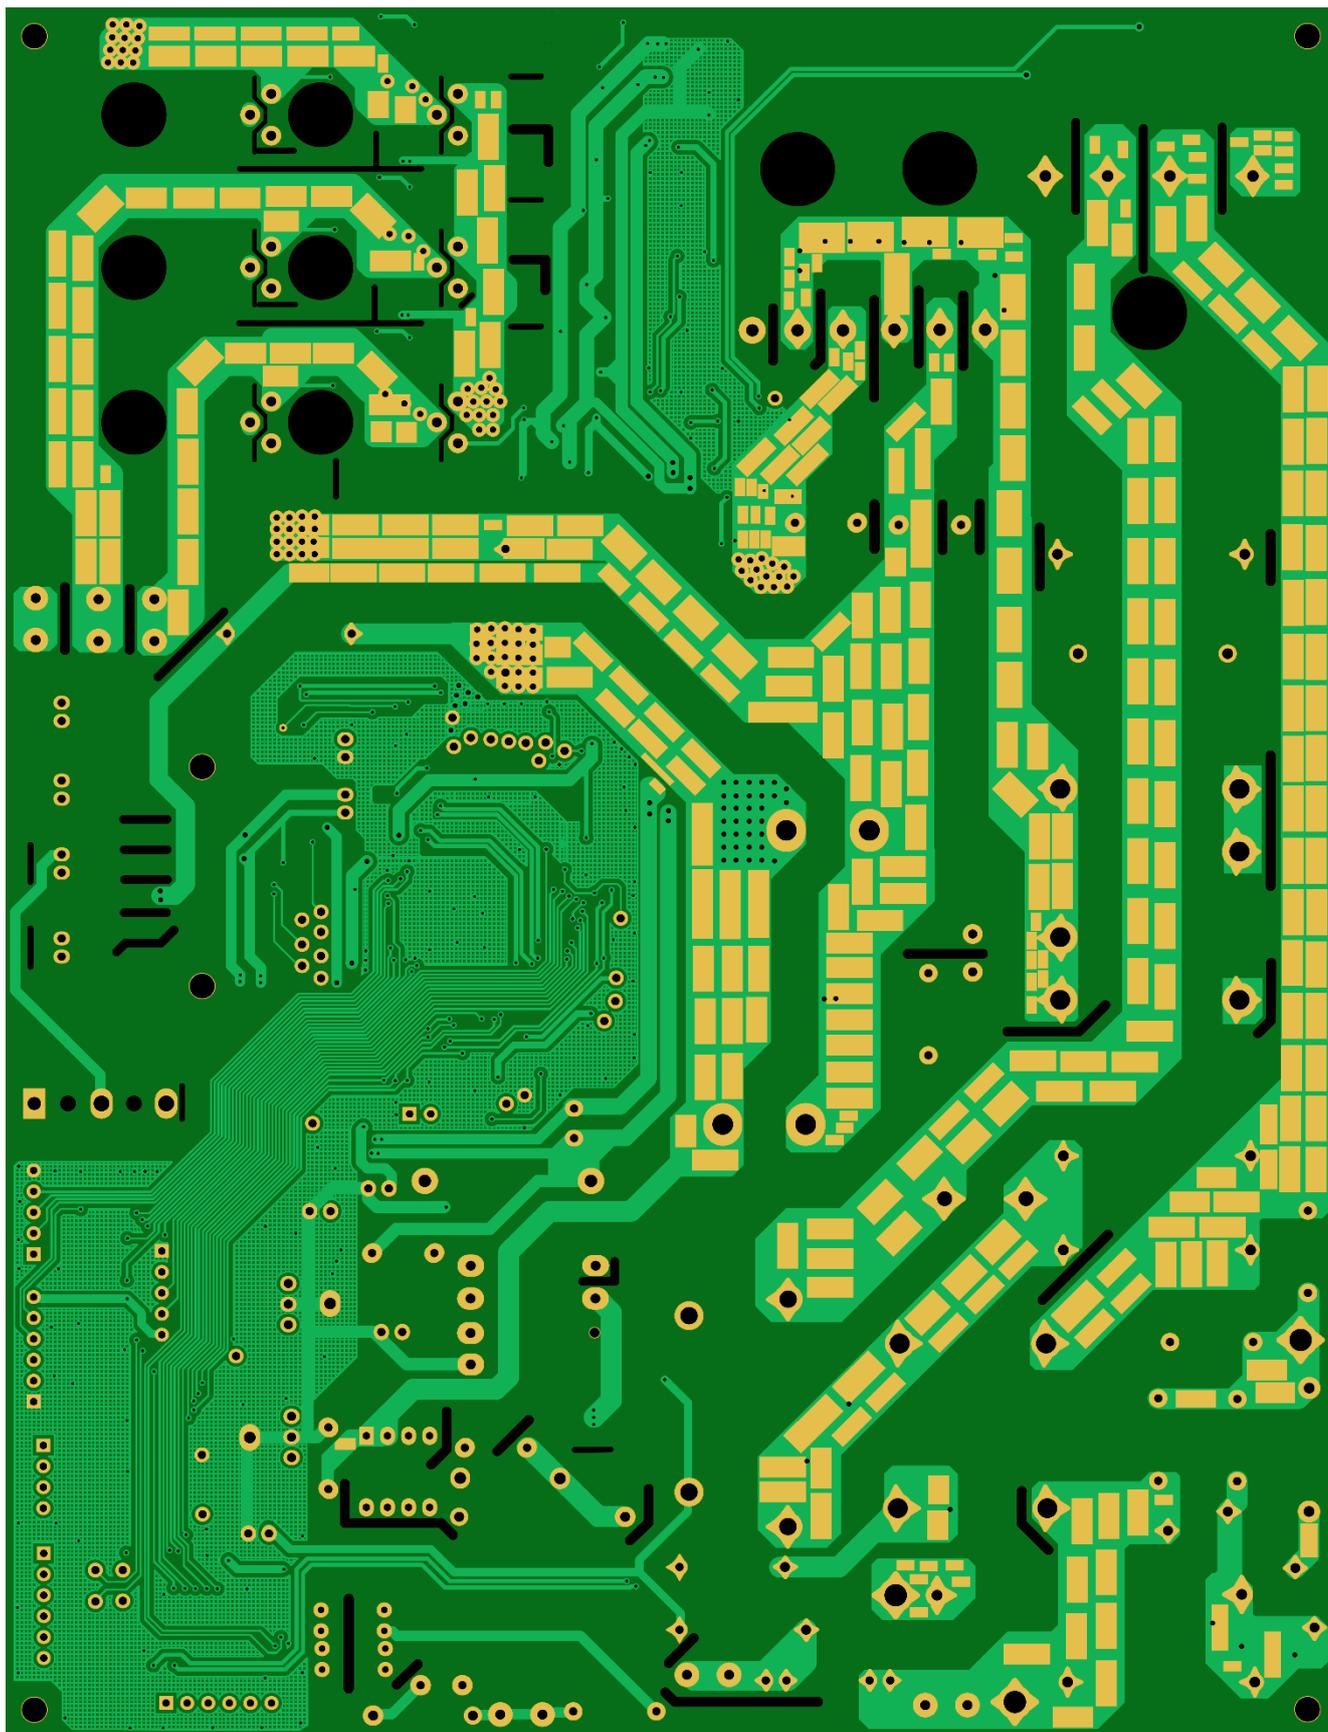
PCB Layout of the Main Components of the Air Conditioner Outdoor Unit Circuit (Bottom)
